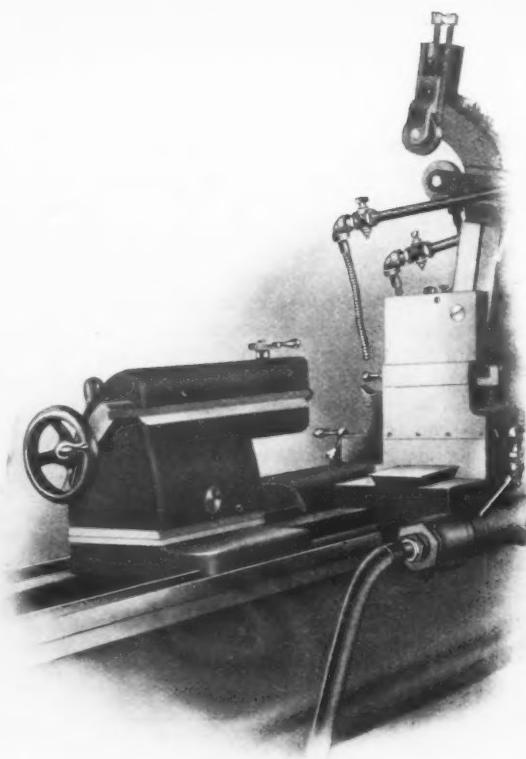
A Detail of the Tailstock of the Prentice Shaft Turning Lathe.
